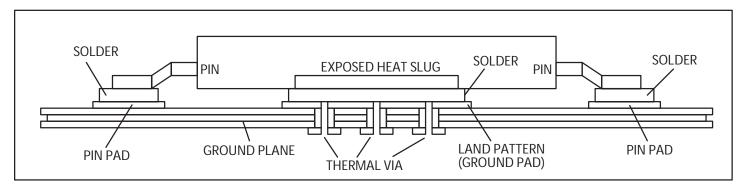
ASSEMBLY FOR EXPOSED PAD THERMAL RELEASE PATH -SIDE VIEW (DRAWING NOT TO SCALE)
